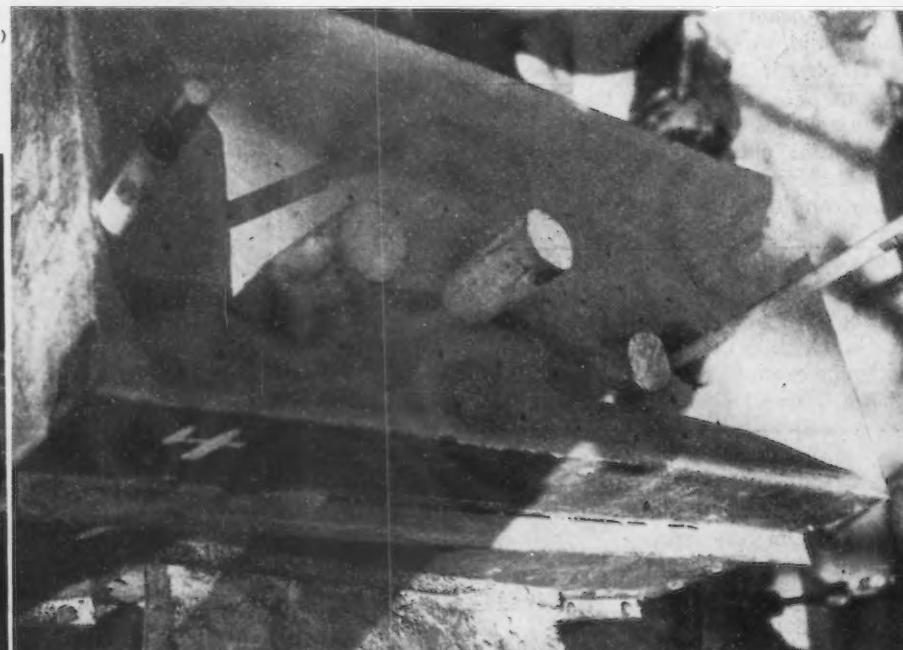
The first step is to make wax patterns at the joints of the stern frame sections. The mold box is shown prior to sand packing. Later the wax is melted out through the heating gates leaving a cavity in the sand to be filled by the Thermit weld.
